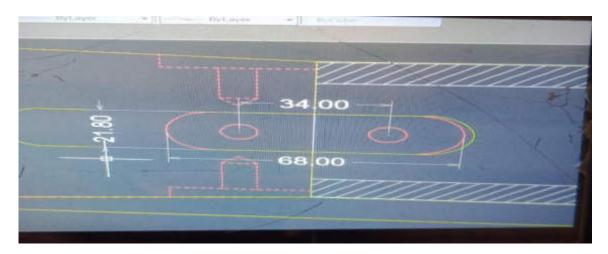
AutoCAD Drawing Of 68 mm Pin
